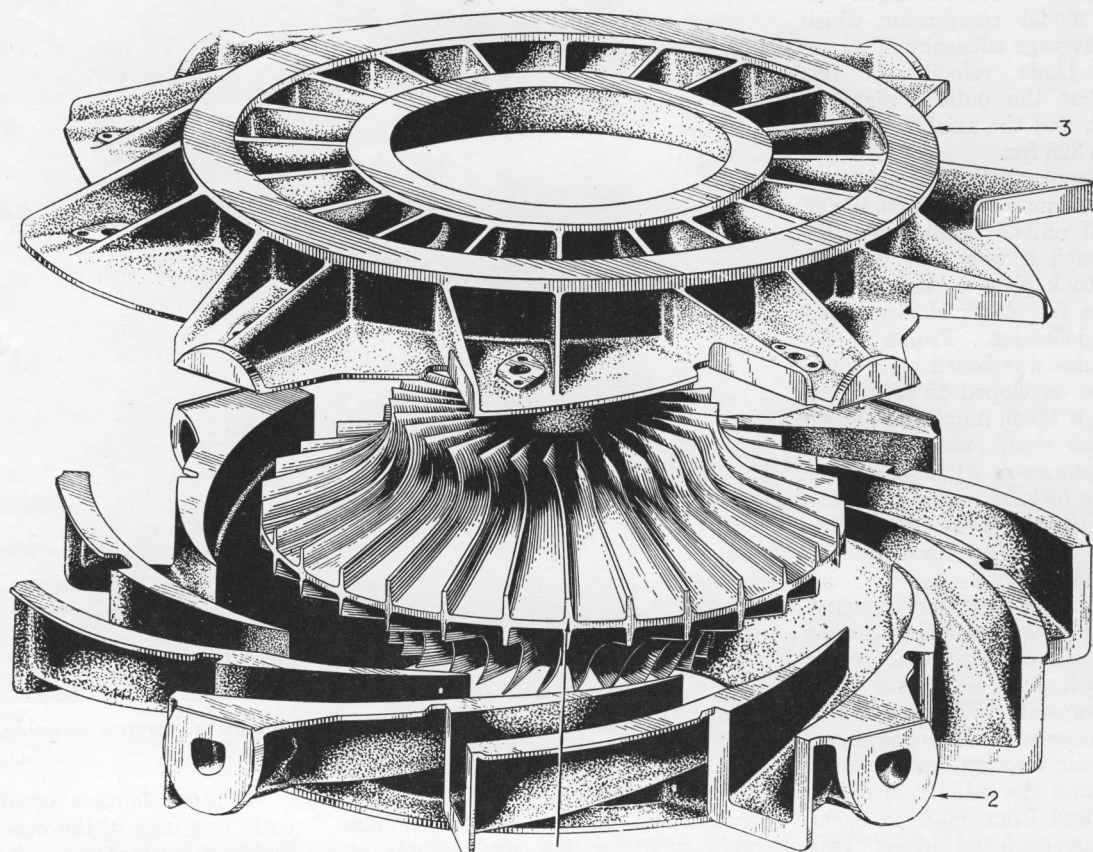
View of the I-16 centrifugal air compressor showing (1) double-sided impeller; (2) diffuser and lower casing (3) upper casing.
